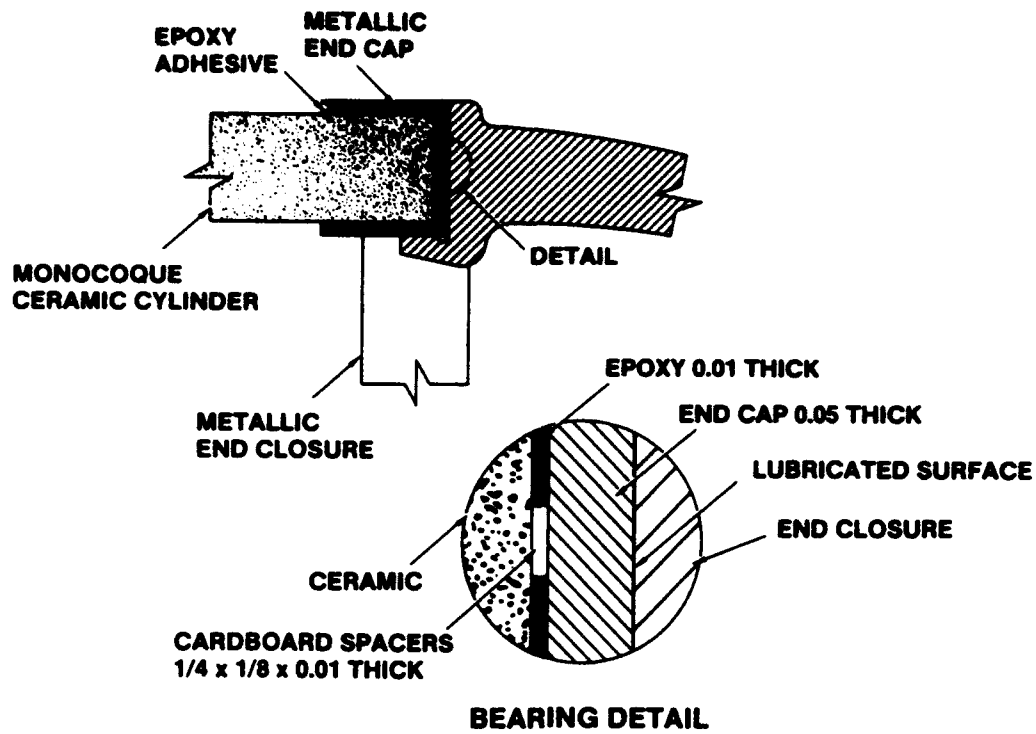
Encapsulation of ceramic bearing surfaces in metallic end caps against fretting.
